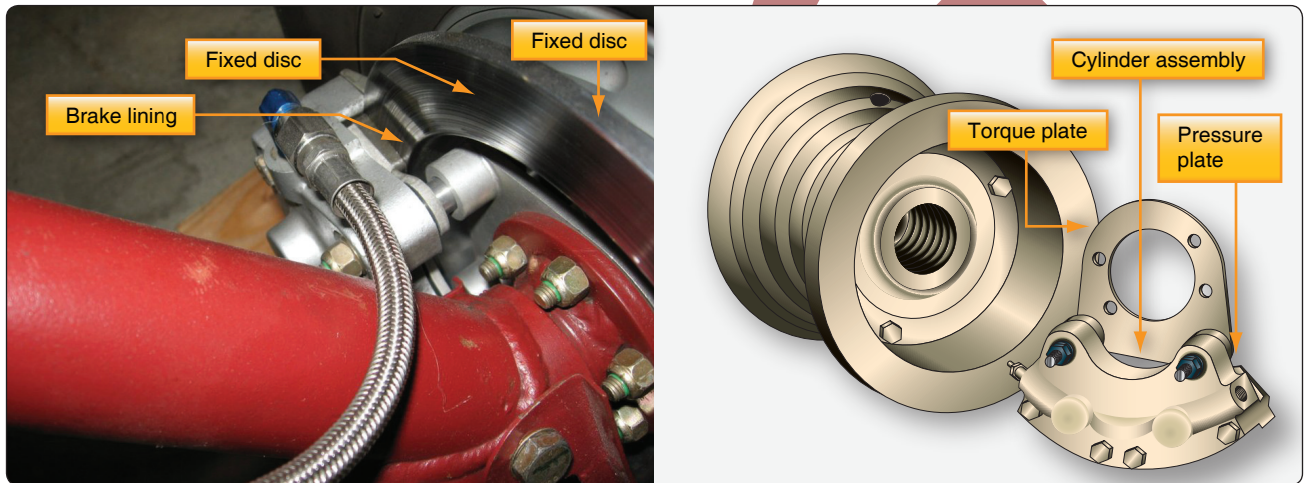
A Cleveland brake on a light aircraft is a fixed-disc brake. It allows the brake caliper to move laterally on anchor bolts to deliver even pressure to each side of the brake disc.
